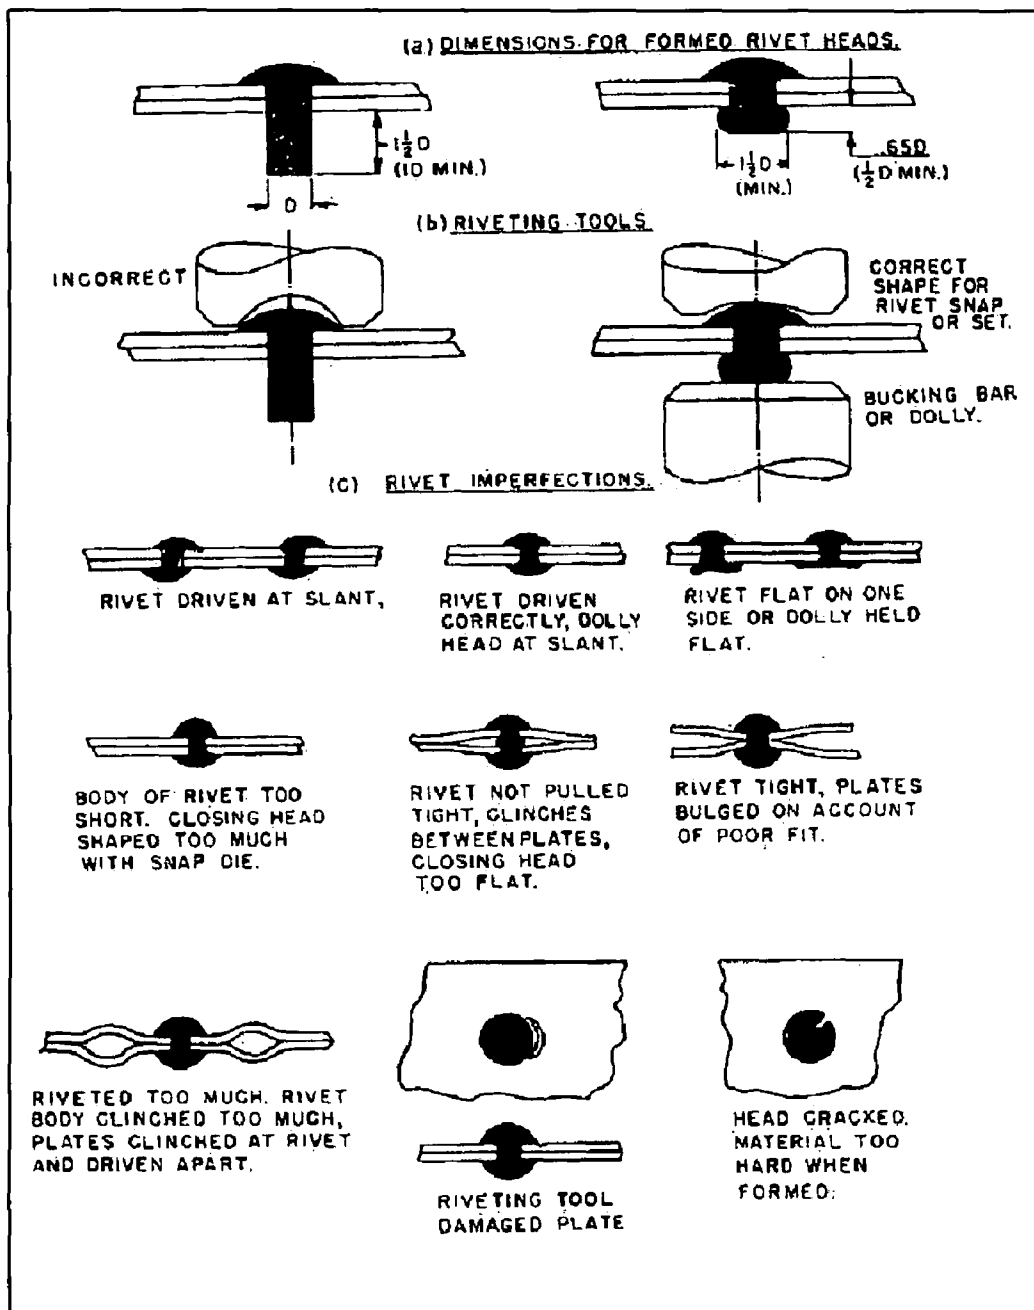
Dimensions for formed rivet heads and common imperfections [47]
